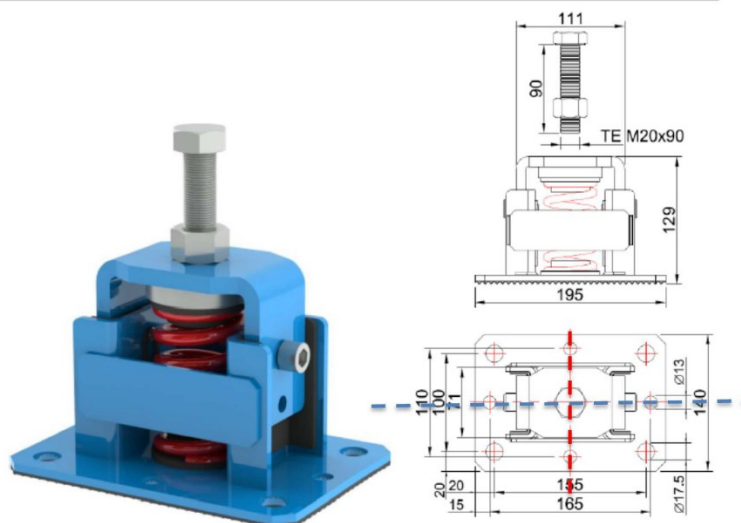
Image and drawing of one support under testing (example), to show parallel (blue line) and perpendicular (red line) direction for shear tests.
